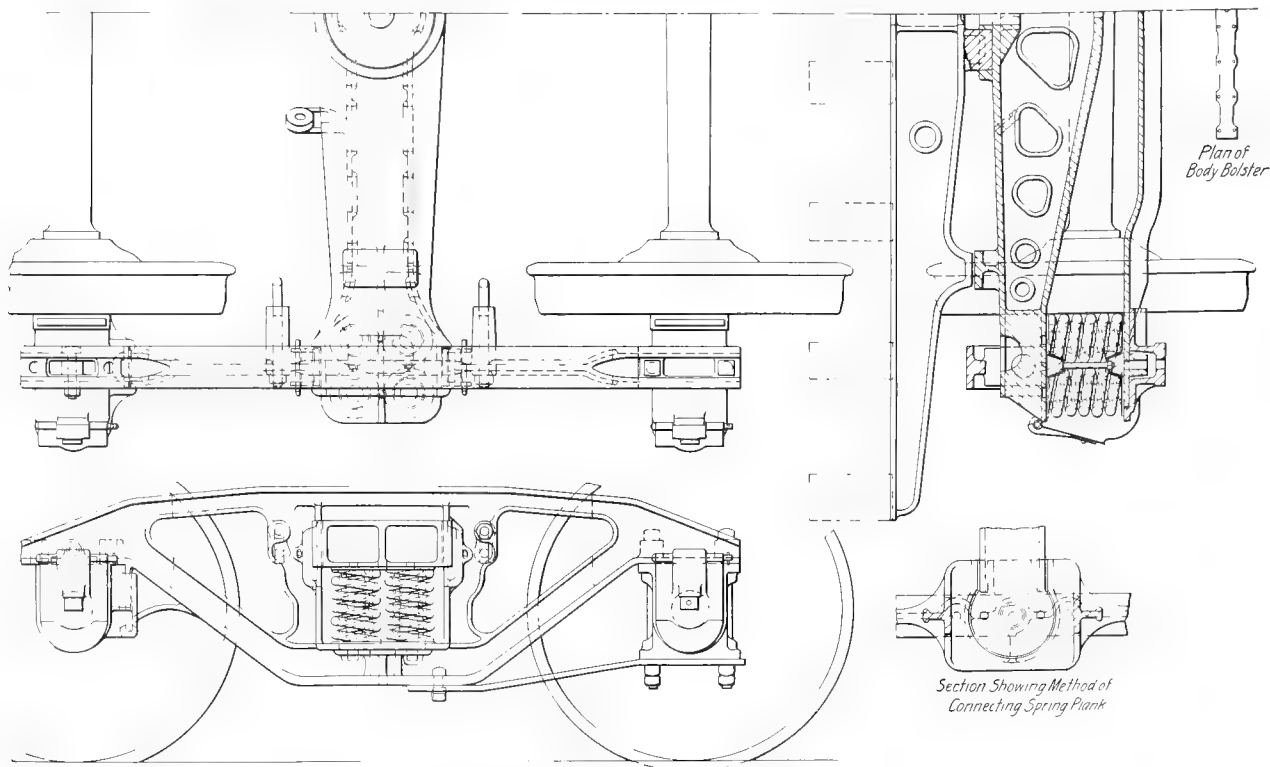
Cast-Steel Bolsters and Side Frame.
